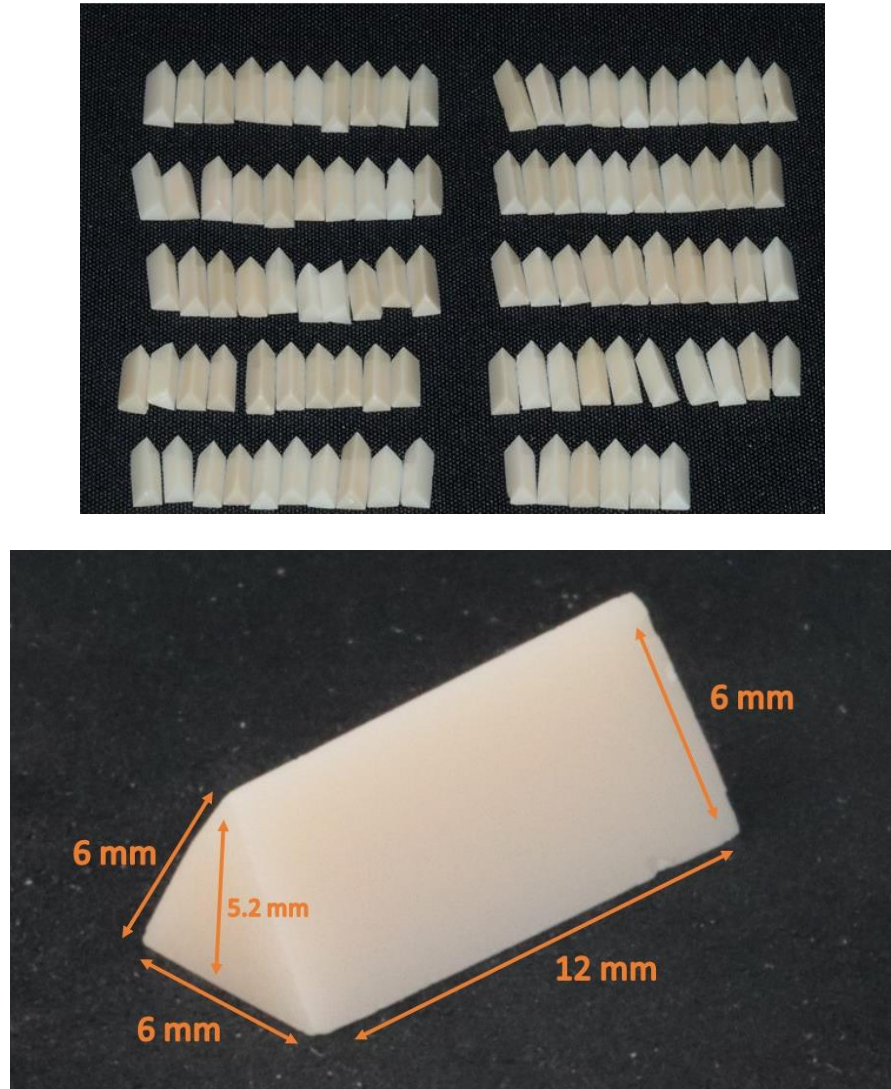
Sintered NTP specimen dimensions and fired specimens.
